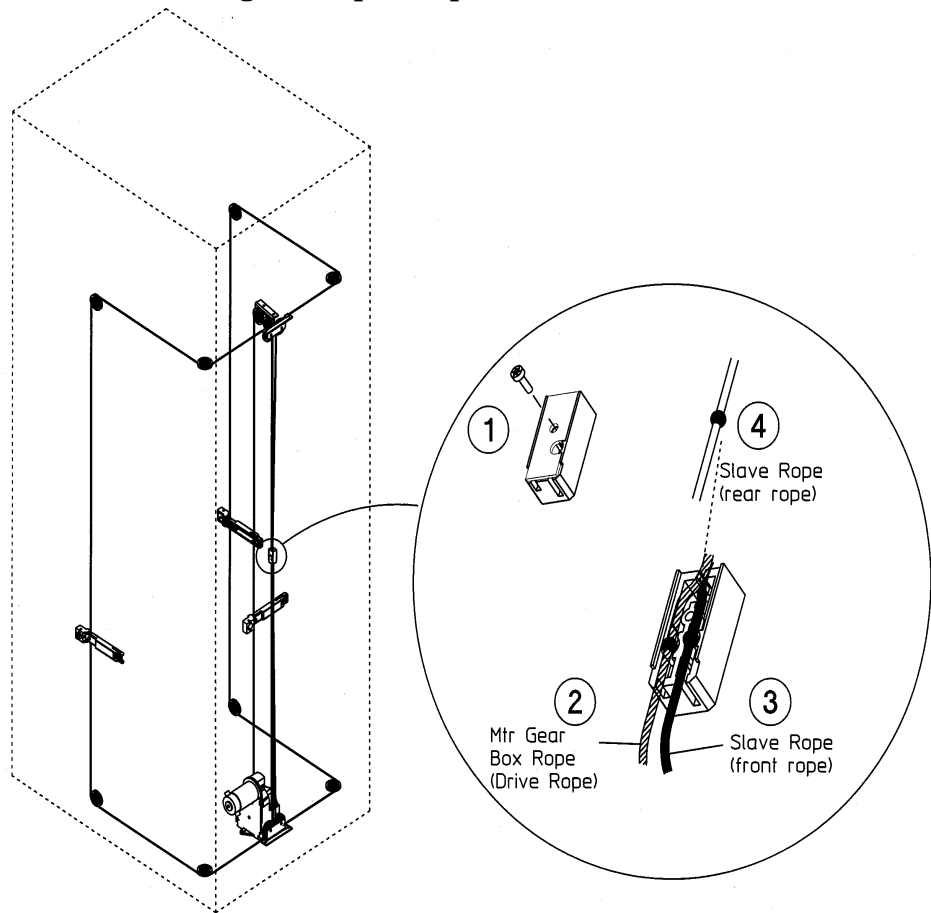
Opening the Tensioners to Relieve Cable Tension
